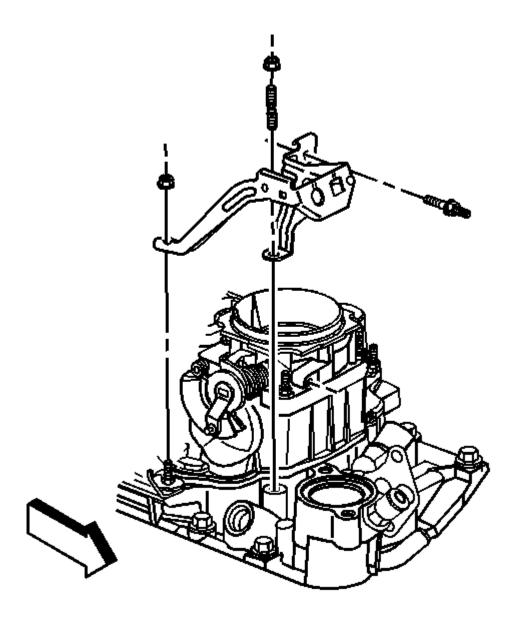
View Of Accelerator Cable Bracket Nuts Courtesy of GENERAL MOTORS CORP.
